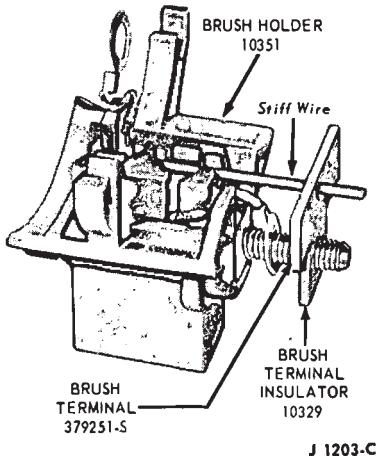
Brush Holder Assembly—Except With Integral Regulator
